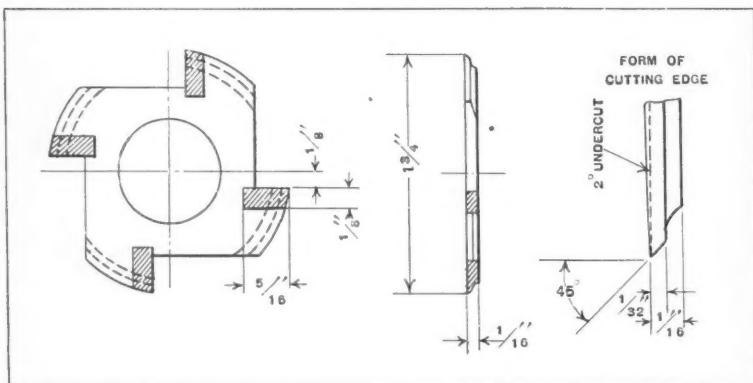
A Carboloy-tipped Cut-off Tool 1/16 Inch Thick
